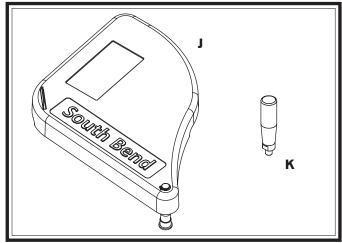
Cutterhead guard and fence adjustment wheel handle inventory.
